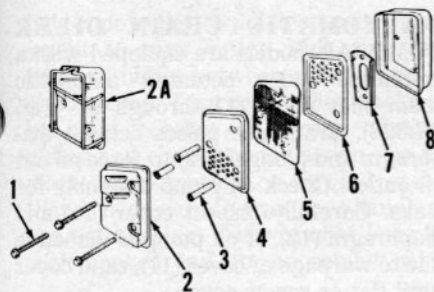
Exploded view of muffler. Cap (2A) is used on Model 330W.
